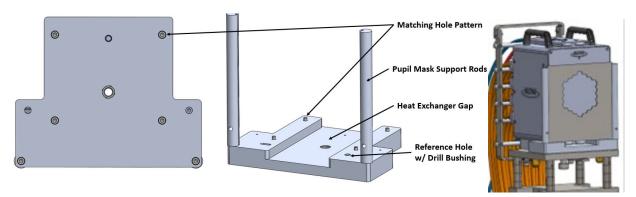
Top plate of DM mount (left and center). A mounted pupil mask is shown at right.
